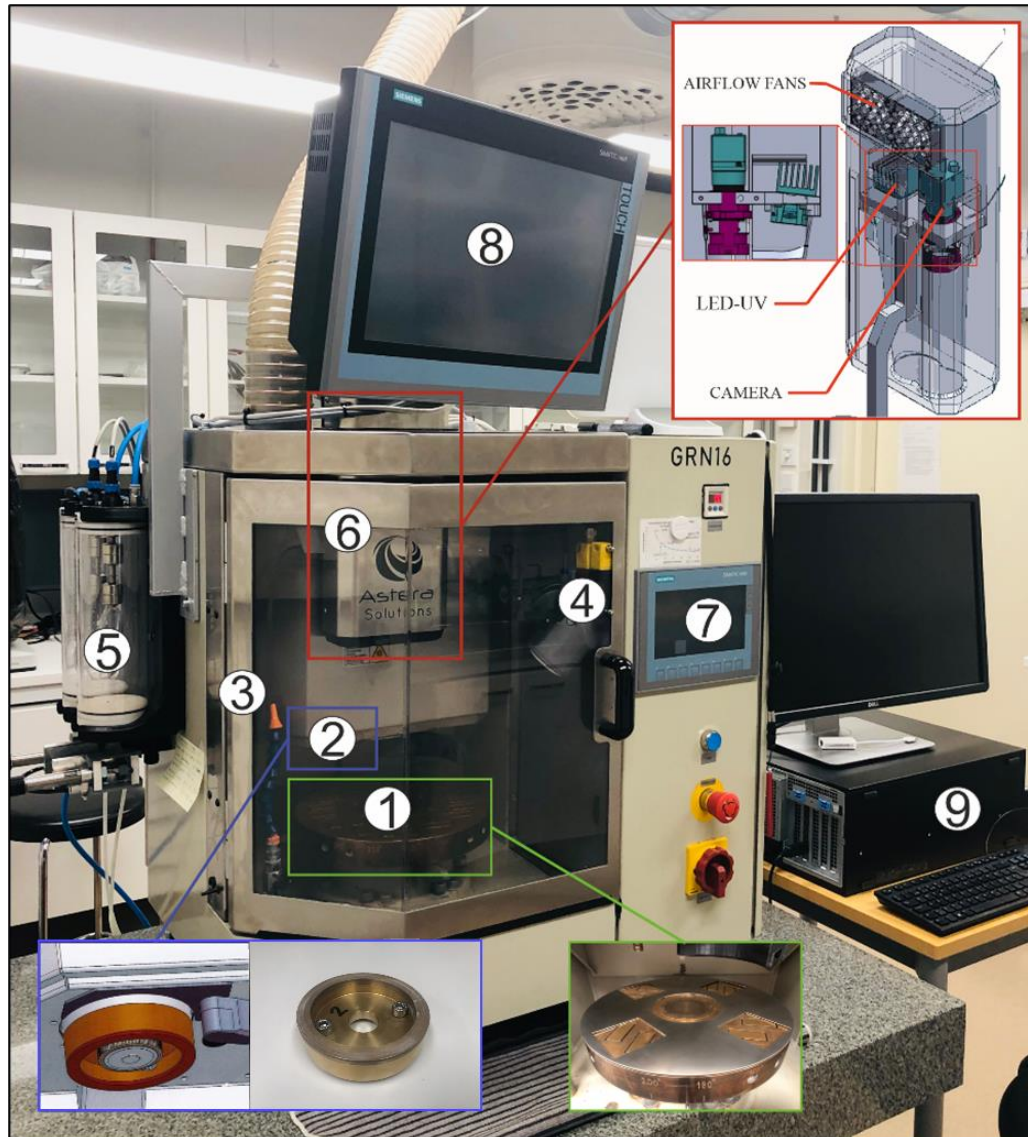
The main components of the GRN16 –grinding machine: 1 = rotating sample plate with vacuum system providing the capacity for sixteen thin section samples and four 3D-samples (see the steel holder for 3D-samples), 2 = spindle with convertible diamond-coated cup grinding wheel, 3 = water lubrication syringe, 4 = lamp emitting visible light, 5 = vacuum water separation chambers (deviating from the picture, there is nowadays only one chamber at the back of the machine), 6 = camera system with servo motor (moving the camera in Z-axis), UV–A-led –light (365–405 nm wavelength), and airflow fans for preventing the dust and humidity to enter the camera casing and the lens (the design drawing is a rear view), 7 = Siemens KTP700 –main control panel, 8 = Siemens TP1500- display for monitor the position, vibration, and torque of the spindle, 9 = PC-unit controlling the camera system with Python-language based 3DUTUSGG- software when operating GRN16 in 3D-grinder mode.
